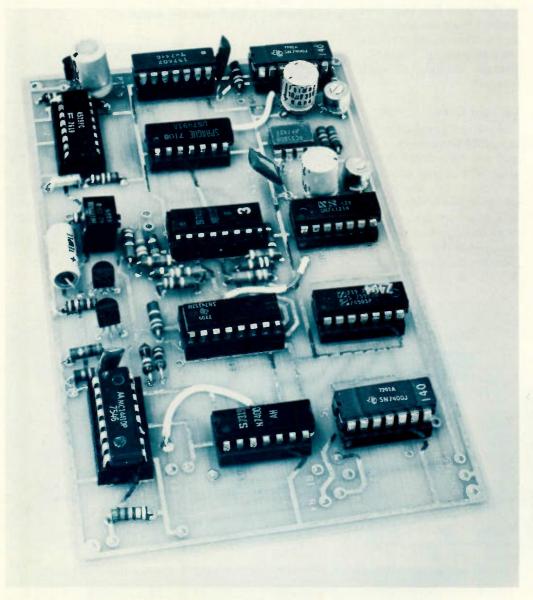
Photo A. This is a photograph of the completed autodialer printed wiring board. The memory (center) should always be in a socket.
